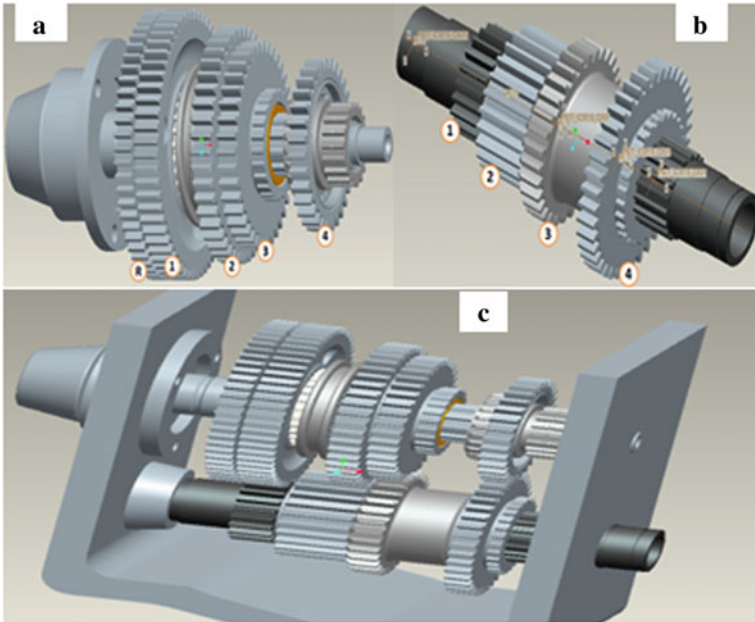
Pictorial view of gear meshing system showing a upper shaft, b lower shaft and c gear mounting
